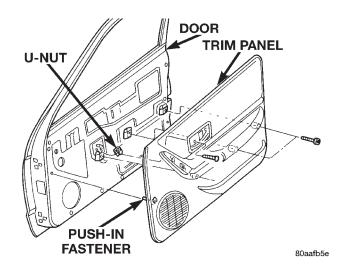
Front Door Trim Panel Remove/Install - Power Window
